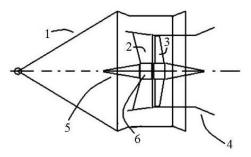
Turbine components: (1) cone-shape protecting grid, (2) stator or guide vanes, (3) propeller, (4) suction tube, (5) center cone and (6) transmission box [17].
